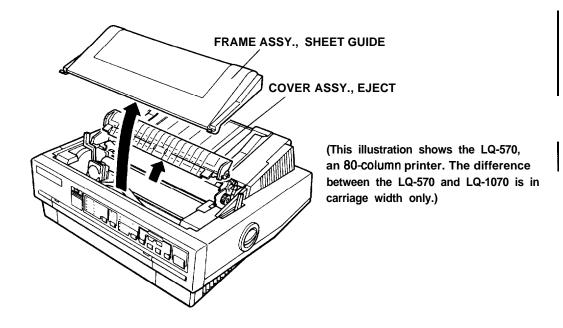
Removing the FRAME ASSY., SHEET GUIDE and the COVER ASSY., EJECT
